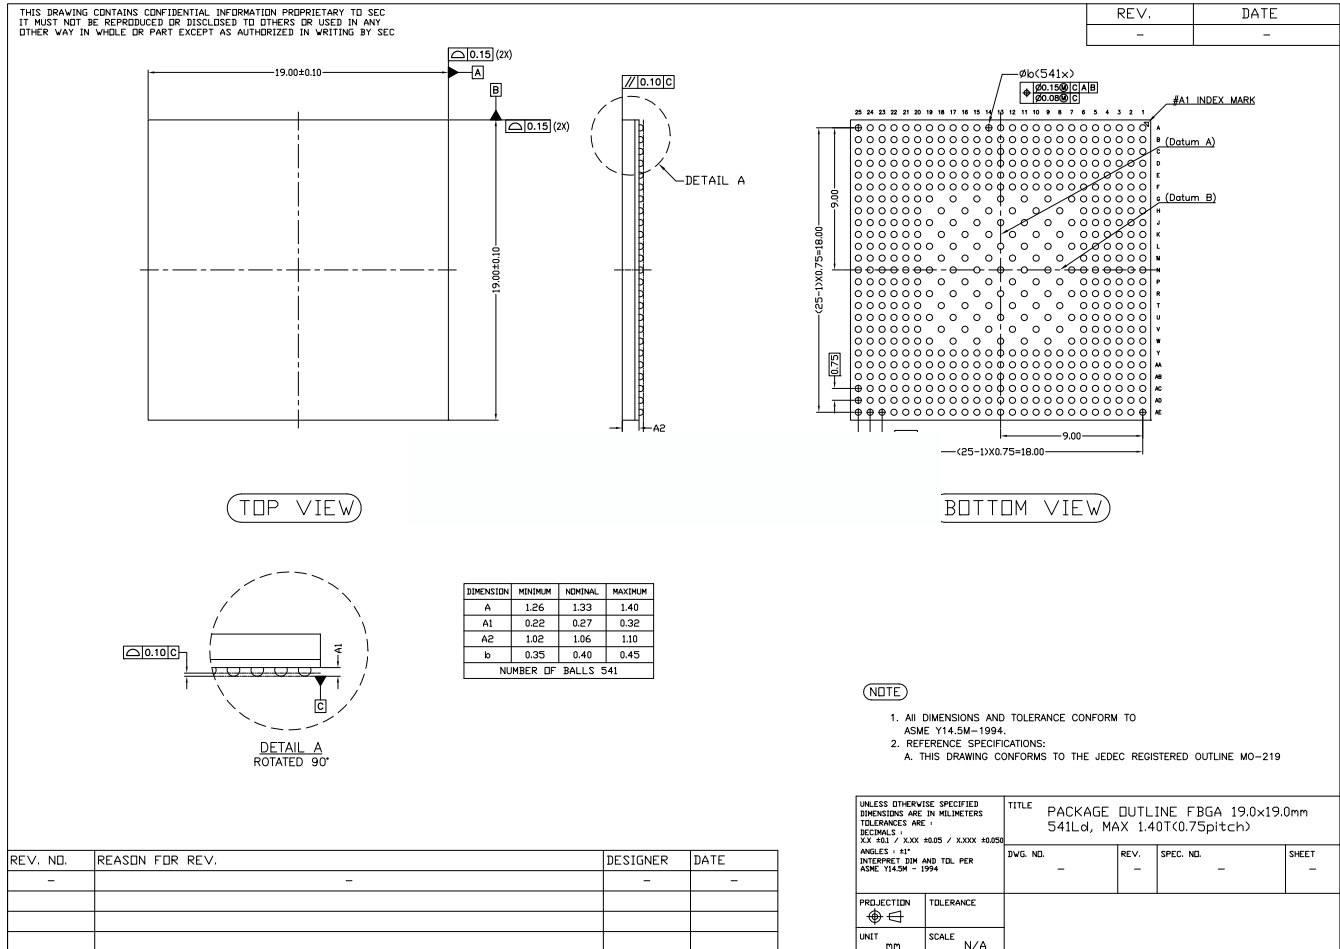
19 x 19 mm BGA, Case x Package Top, Bottom, and Side Views
